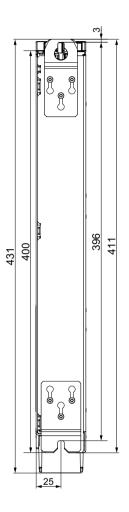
NCU 1750 dimension drawing; dimensions in mm
